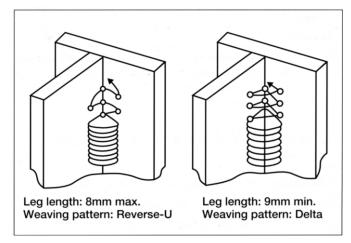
Typical weaving patterns suitable for vertical-up fillet welding
